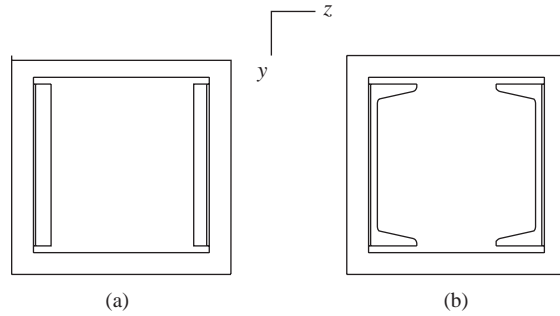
Cross-section of a cantilever square box beam with internal constrained viscoelastic layers: the box has a length of 1.60 m, a width of 0.26 m, and a wall thickness of 12.5 mm. The constraining layers are (a) aluminum plates, and (b) steel channels.
